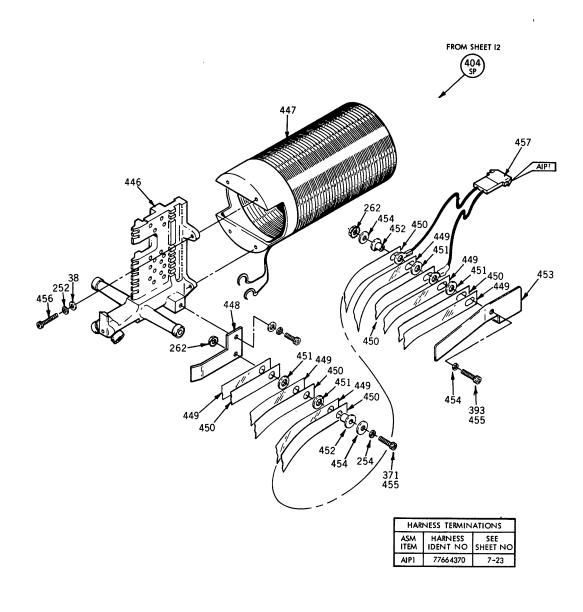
DECK ASSEMBLY, BOTTOM VIEW (SHEET 3 of 3)
